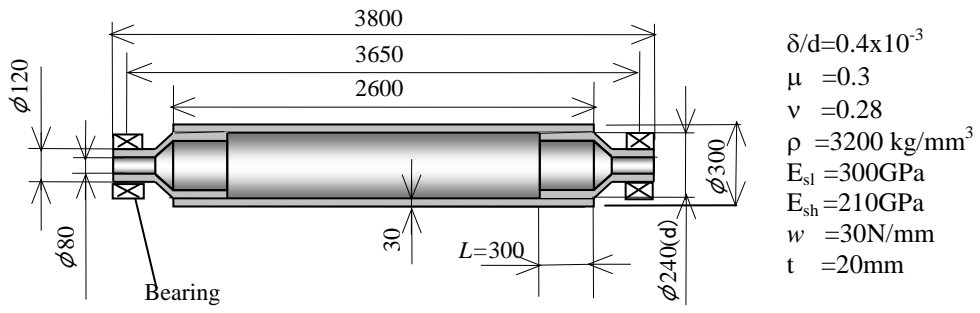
Structure and dimensions of the new roller model with standard dimensions(mm).
